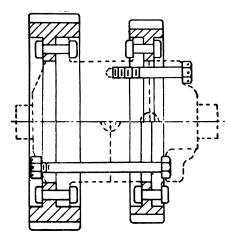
Spur gear mounting of type joined by rivets and cap screws or long bolts
